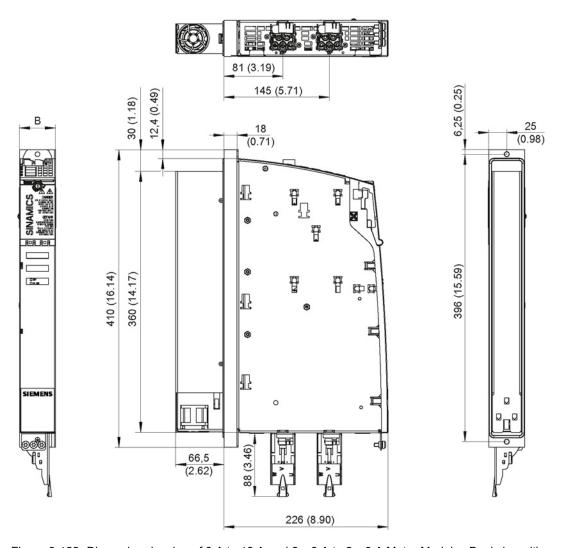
Dimension drawing of 3 A to 18 A and 2 x 3 A to 2 x 9 A Motor Modules Booksize with external air cooling, all dimensions in mm and (inches); example: 2 x 5 A Double Motor Module
